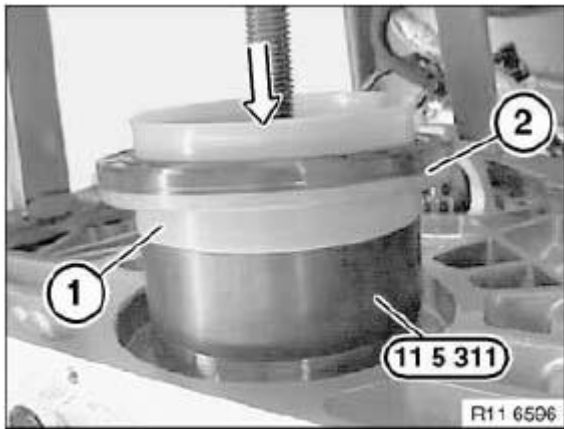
Installing Special Tool (11 5 311) With Bolts
